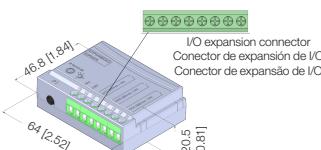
CFW300-IOADR dimensions in mm [in] and connectors location
